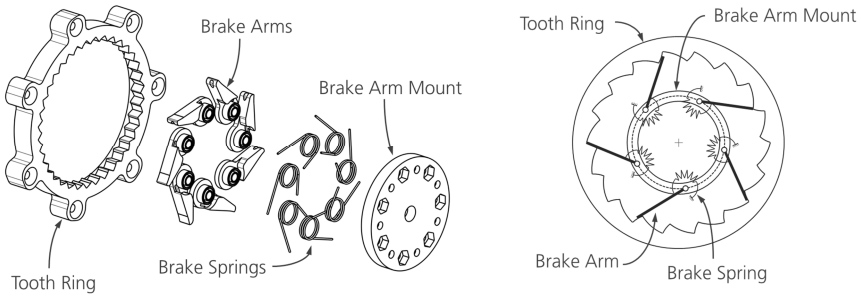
Components of the Spool Brake Mechanism in exploded view (left) and approximation model (right).
